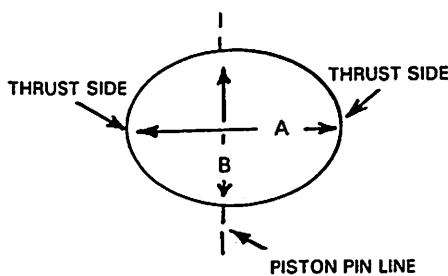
Exaggerated top view of a cam ground piston, which is designed to be wider across the thrust surfaces.
